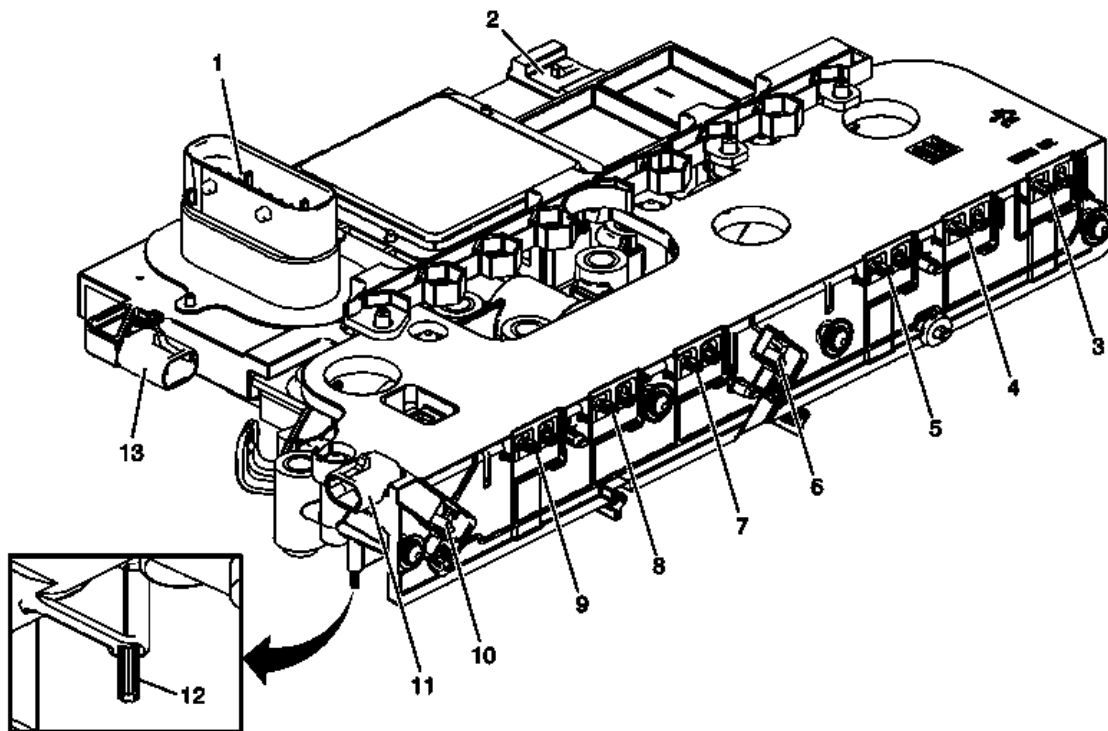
Control Solenoid Valve and Transmission Control Module Assembly
